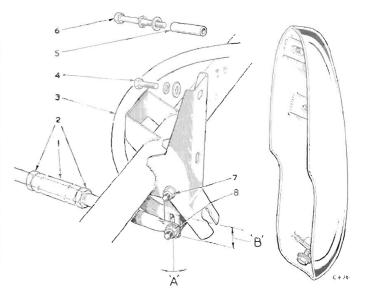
Bonnet adjusting points (Herald 1200, 12/50 and Vitesse)
